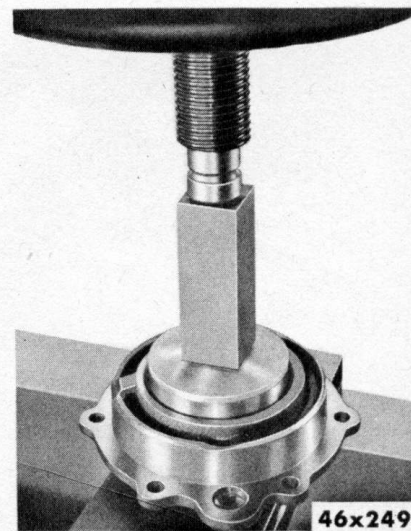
Installing Bearing Cup in Differential Cross Shaft Cap—Tool DD-966
